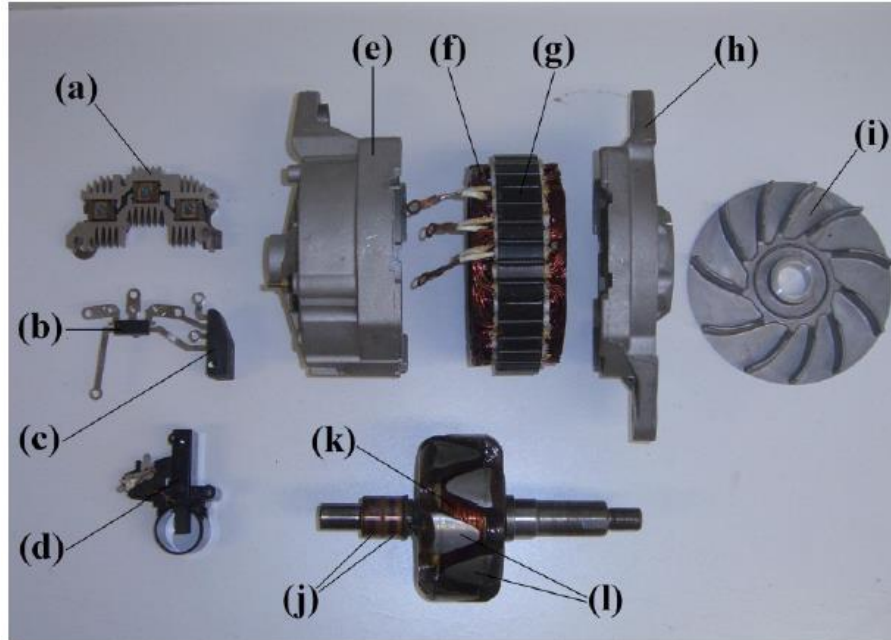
Dismantled alternator: (a) 6 diode full-bridge power rectifier, (b) excitation rectifier, (c) regulator, (d) brush assembly, (e) aluminum rear housing, (f) stator winding, (g) stator laminated core, (h) aluminum front housing, (i) aluminum fan, (j) slip rings, (k) excitation winding, and (l) claw-shaped pole pieces. [16]
